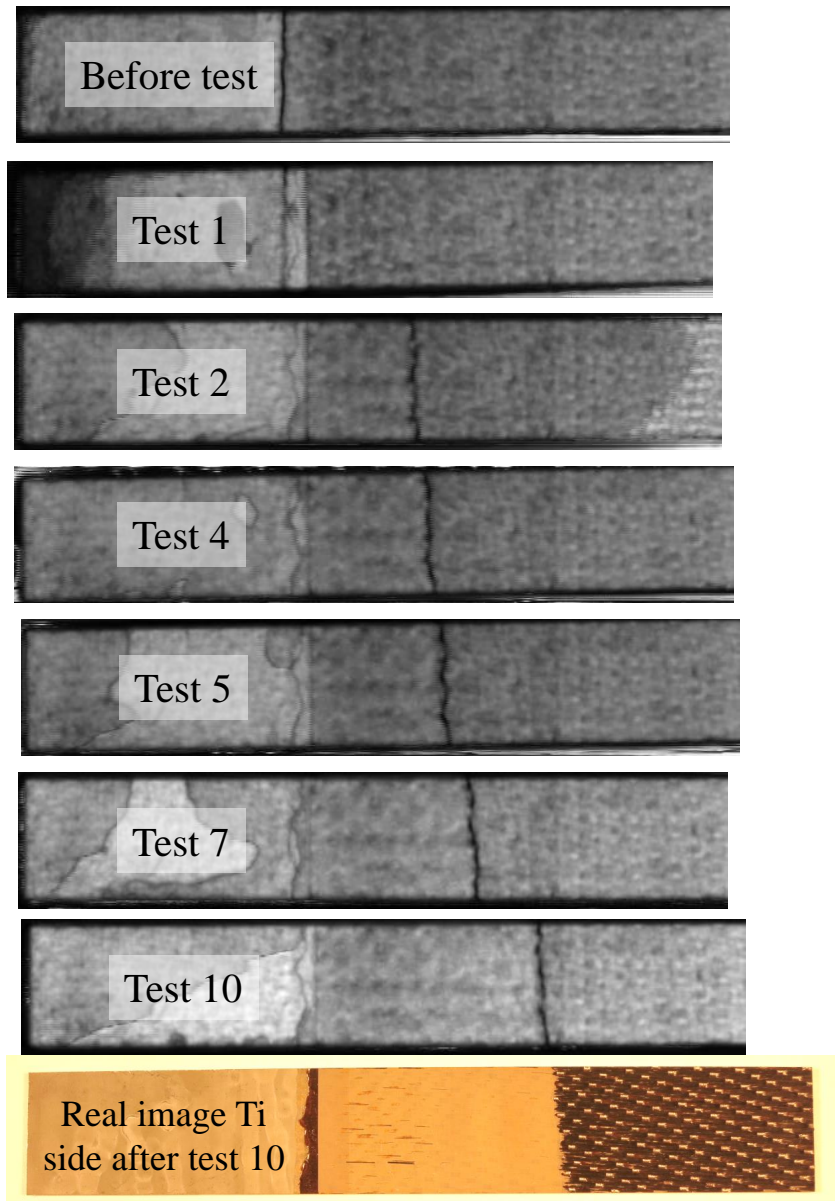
UT scan analysis showing crack progression and the crack front profiles after the 4-ENF tests performed on a Ti\_PEI\_1-hour specimen tested when the crack propagated on the tension side of the beam. This specimen underwent 4-ENF tests at 25 °C.
